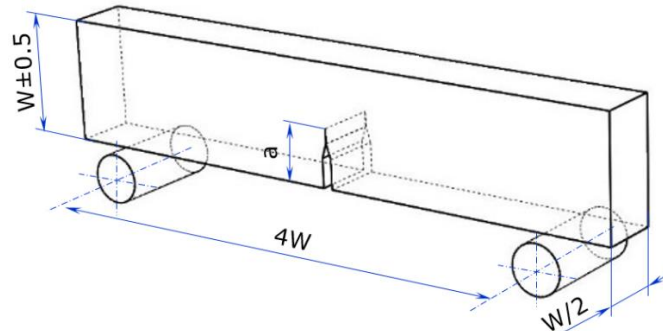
Geometry and dimensions of the 3D printed SENB specimen
